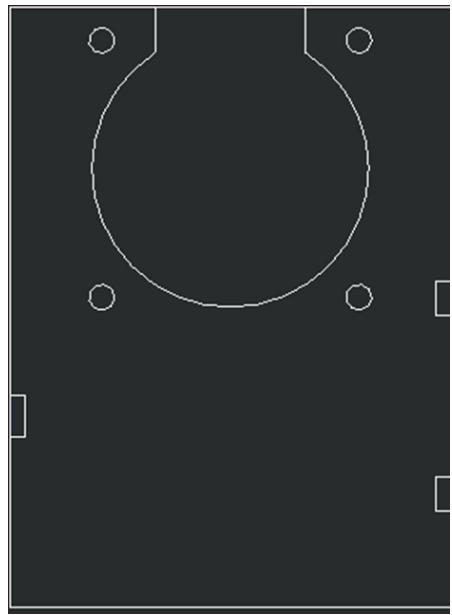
Preliminary Mechanical Design CAD Drawing (Isometric, Zoomed)
